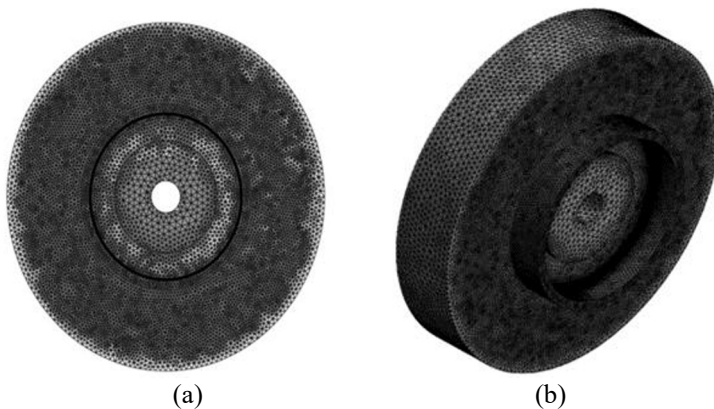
Meshed Models (a) Side view (b) Isometric view
